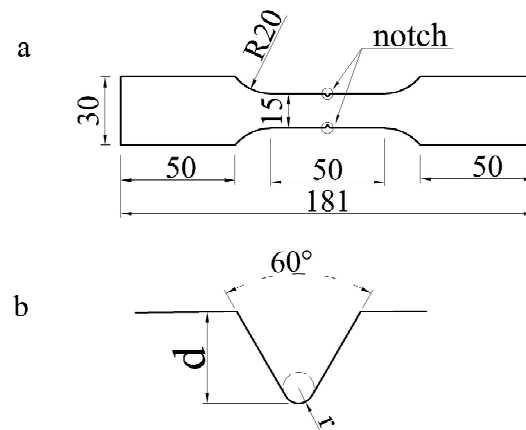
Shape and dimensions of plate specimens; (a) specimen size and geometry (unit: mm), (b) definition of notch size and geometry.
